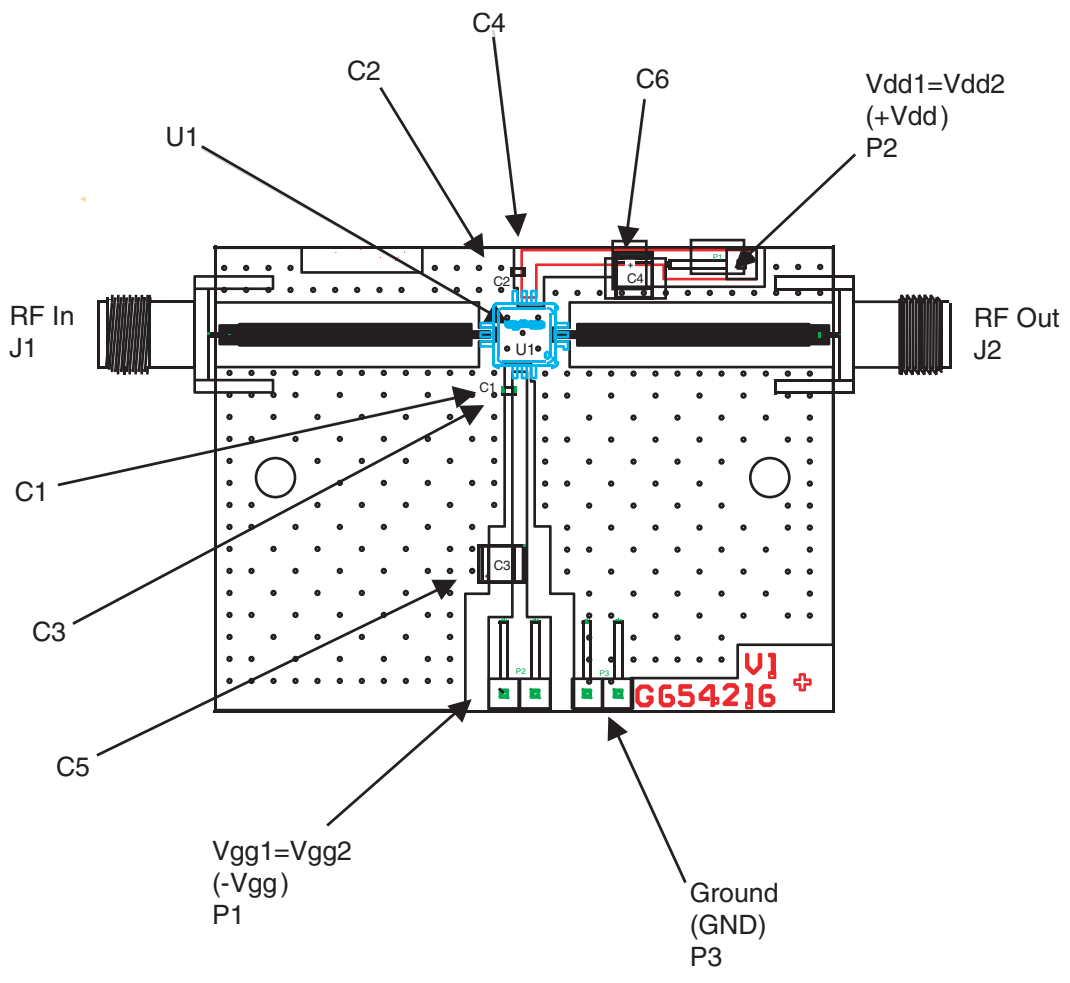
Layout and Assembly of Test Evaluation Board (RMPA2450-TB)
